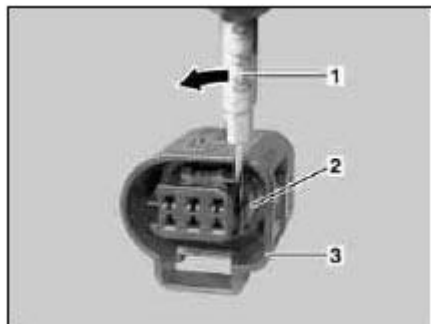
Identifying Release Tool With MLK 1.2 Sleeve Ejector (220 589 01 99 25)
